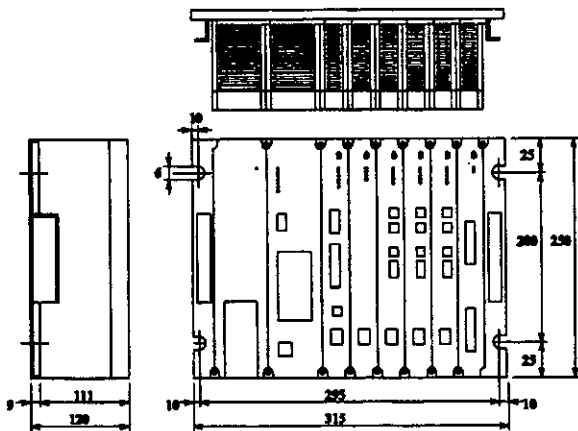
CP-9200SH External Dimensions (MB-03)
